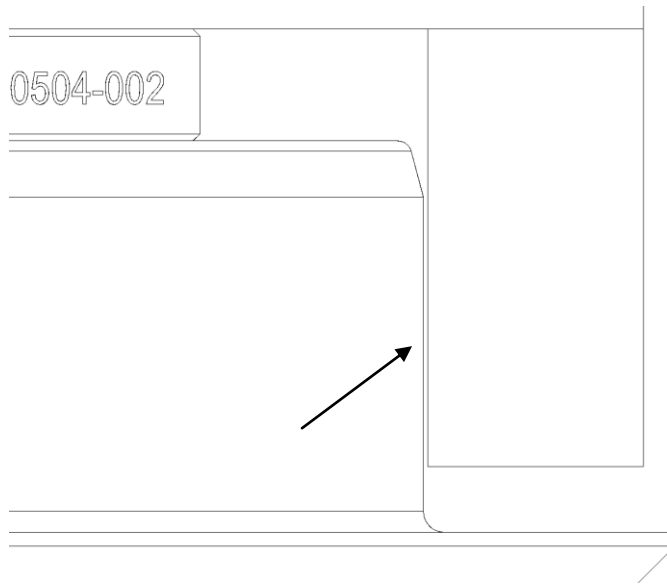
Check Gap between weld plate and gauge tool rotor
